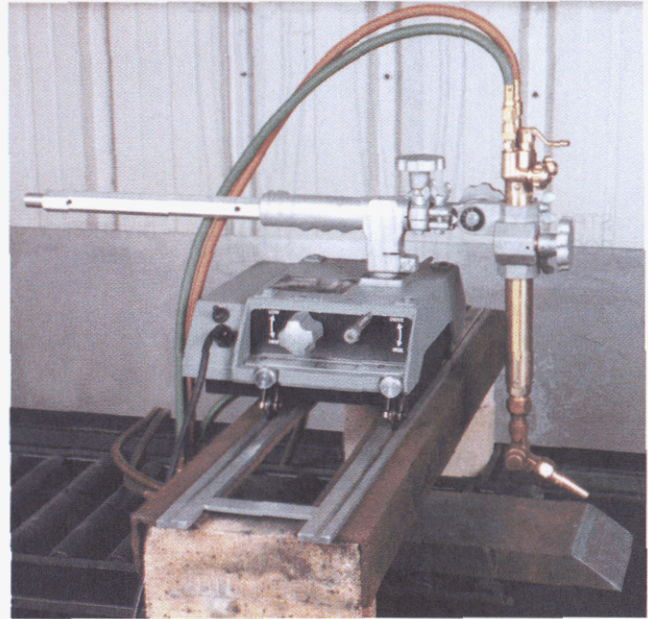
Machine Cutting Torch Mounted on a Portable Carriage
